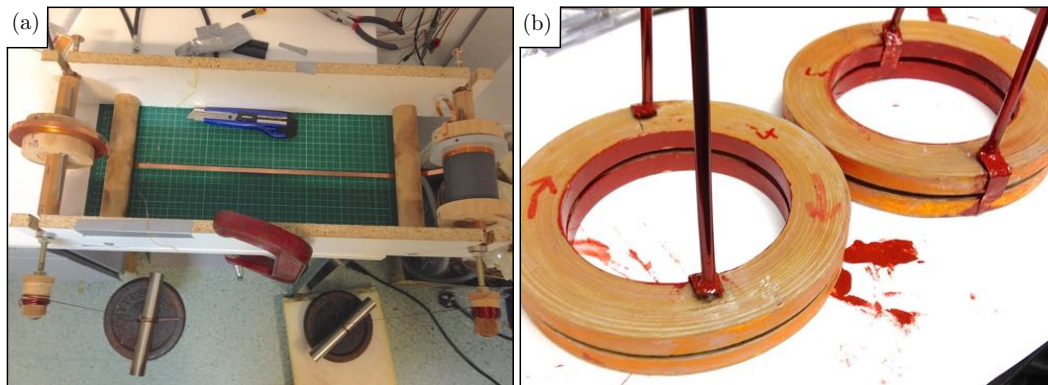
Quadrupole coils & winding apparatus. (a) Commencing on the left side roller the 6.35mm ribbon is passed low over the cutting mat, and then up around the final former. Before reach the otherside, excess kapton is removed against the cutting mat. To maintain tension throughout this process, a mass is hung from both axels. As the coil is wound the left weight ascends while the right descends, hence needing to be reset every seventh turn. (b) Final electrically parallel coil pairs. To prevent corrosion within the water cooling, coil were coated with Cotronics Duralco 128 thermal epoxy. Each pair is separated with three 2mm thick nylon nuts superglued to the lower coil. To prevent corrosion of the electrical contacts, a single coat of MG Chemicals insulating varnish was locally applied.
